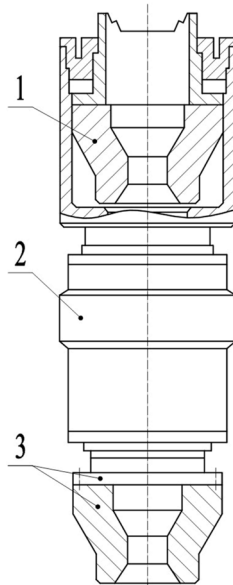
The structure of rotary BOP. 1 - upper drive assembly; 2 - outer cylinder; 3 - lower rubber core assembly.
